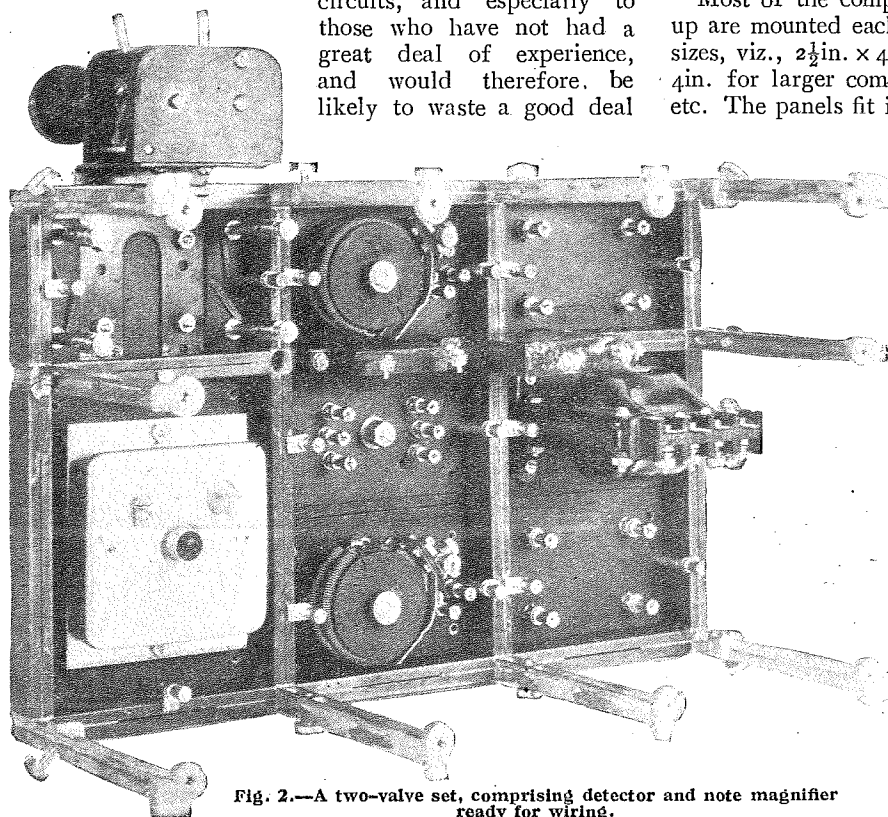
A two-valve set, comprising detector and note magnifier ready for wiring.
